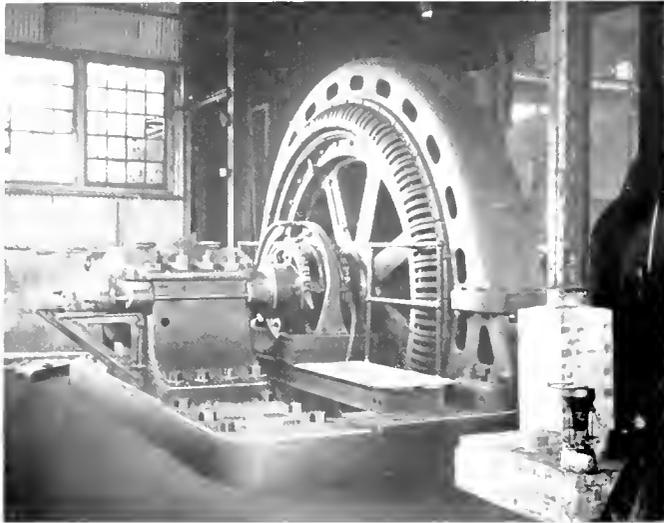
1000 H.P. Induction Motor Driving 20 in. Bar Mill
